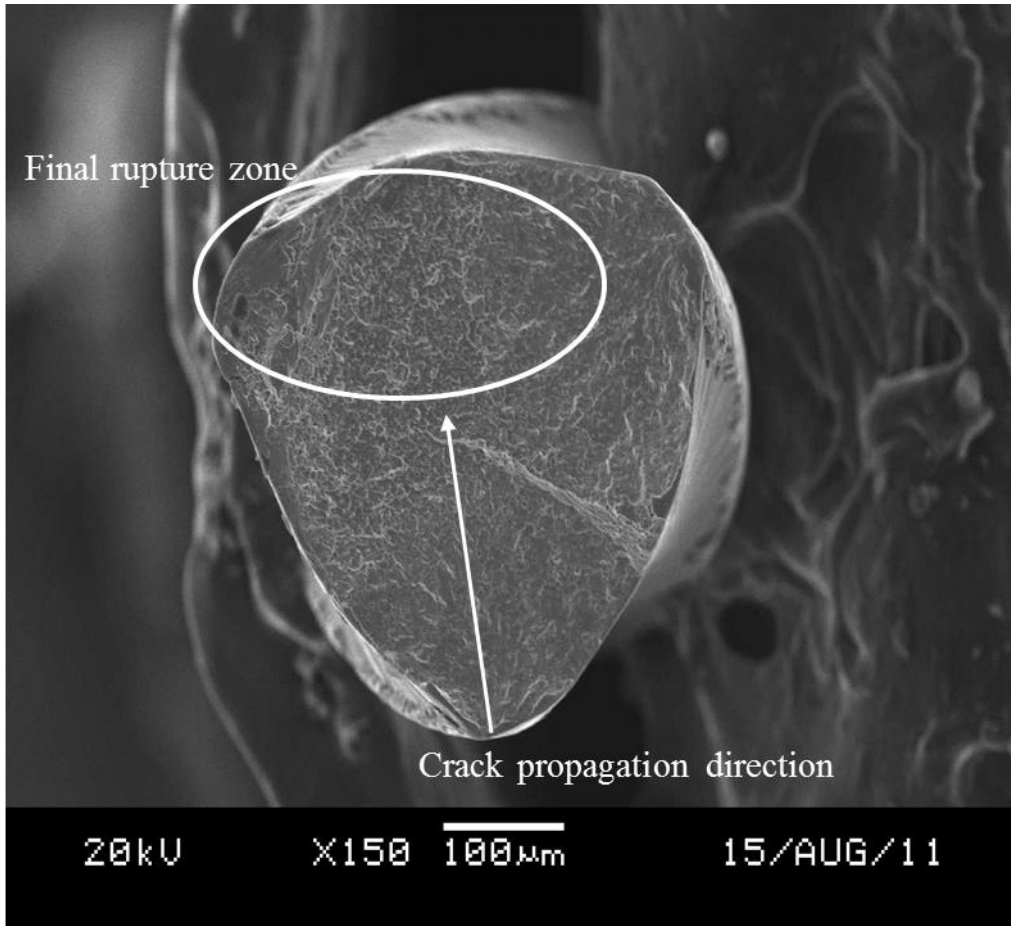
Typical Protaper F2 fracture surface.
